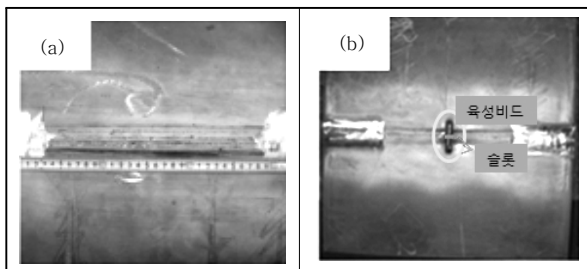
EBT(a) and CST(b) specimens after welding
